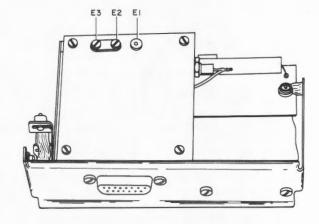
Line Sensor Range Adjustment, Parts Location
